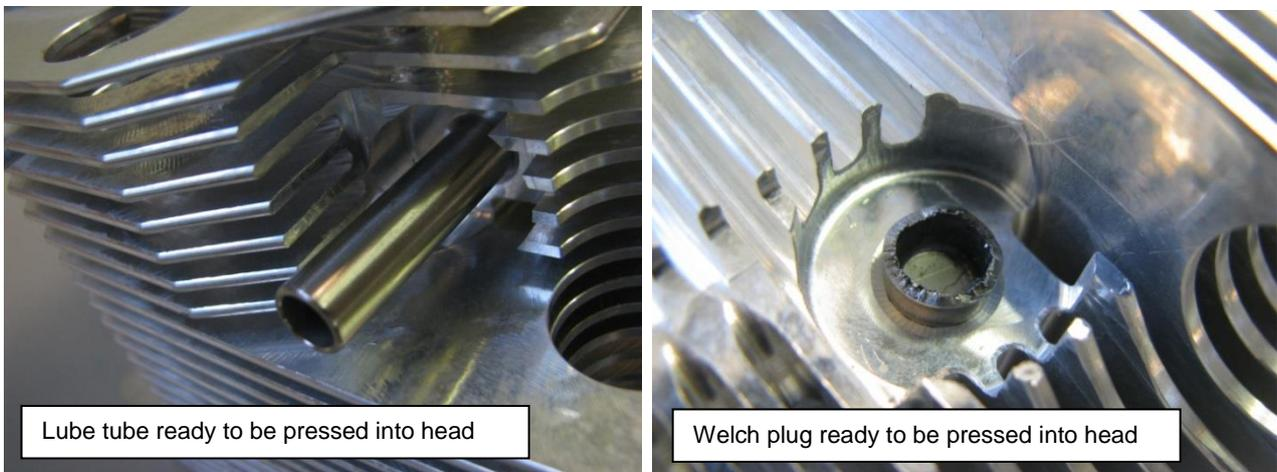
Cylinder Head Welch Plug & Lube Tube Installation.
